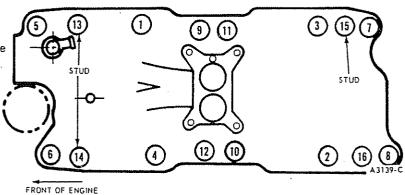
Intake Manifold Bolt Tightening Sequence—351W Engine
